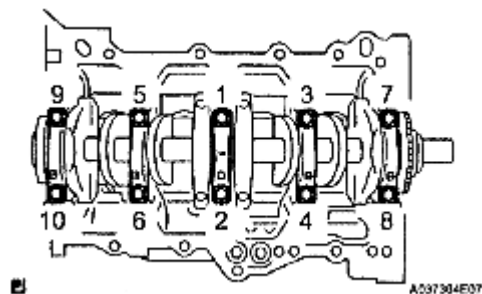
Identifying Crankshaft Bearing Bolts Tightening Sequence
